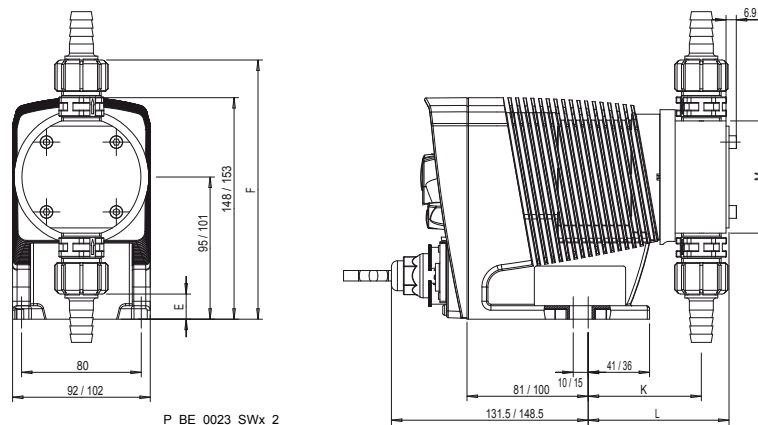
Dimensional drawing Beta b BT4b/BT5b, material version PV for highly viscous feed chemicals - dimensions in mm
